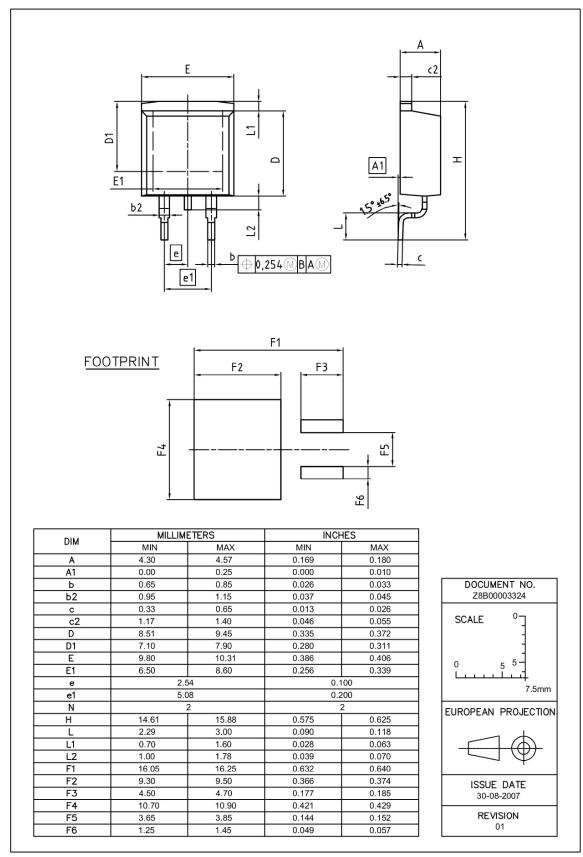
Outline PG-TO 263, dimensions in mm/inches
